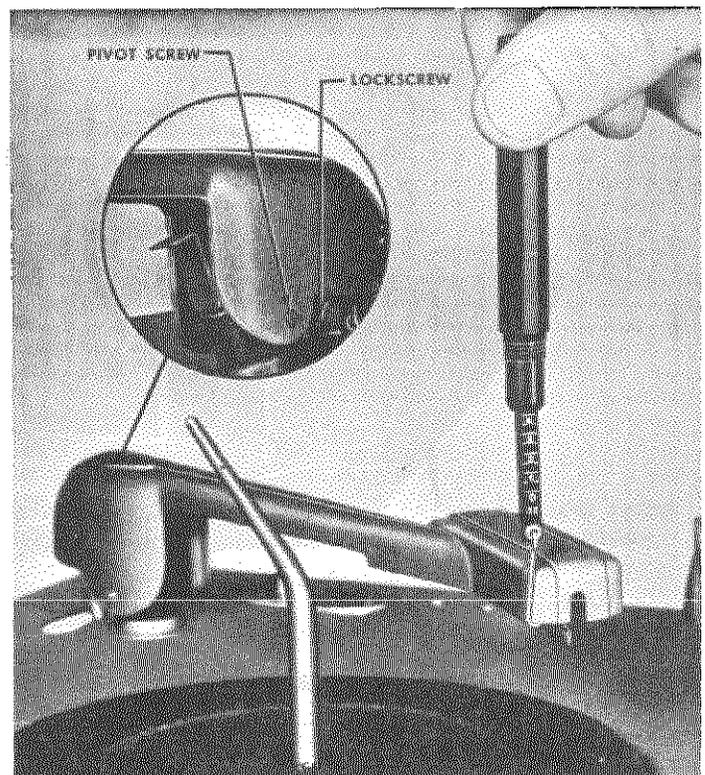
CHECKING TONE-ARM NEEDLE PRESSURE AND VERTICAL FRICTION
